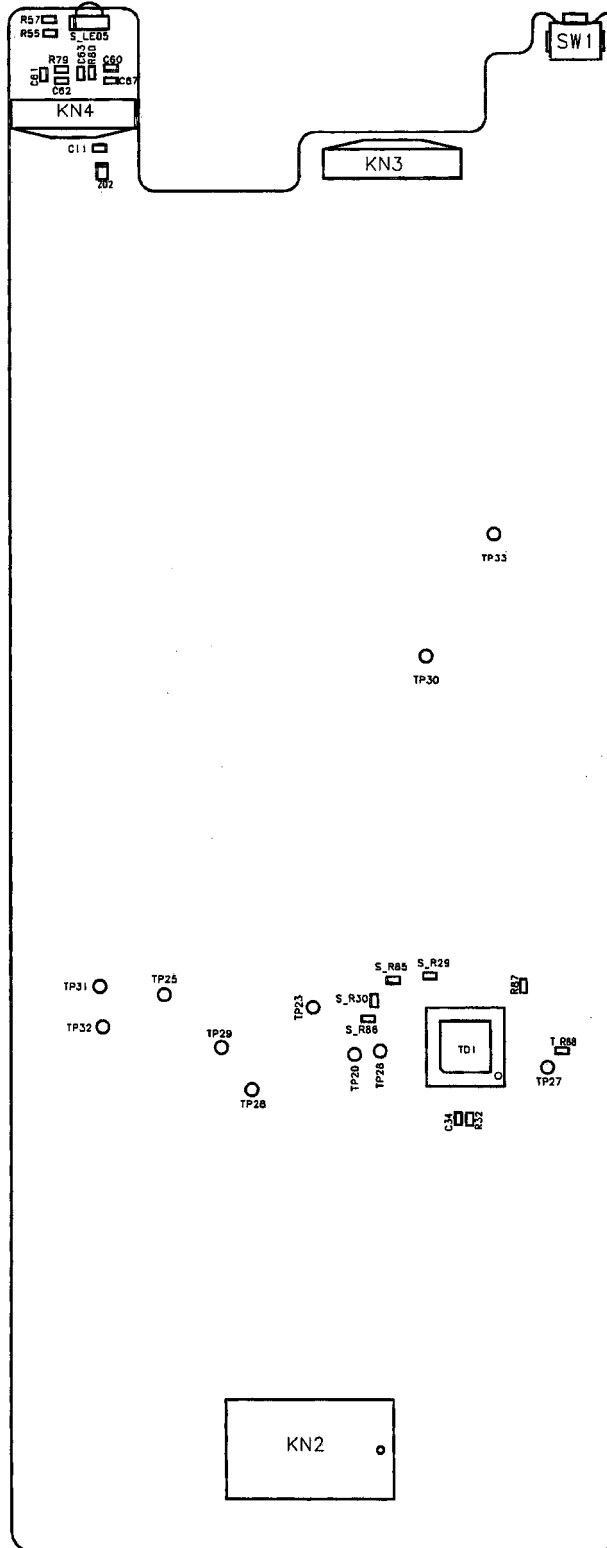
Display and Keypad PCB Assembly Bottom Side
